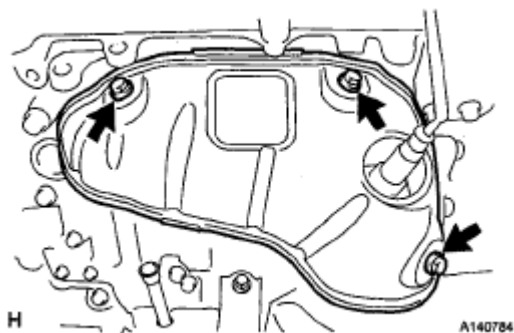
Removing No. 2 Exhaust Manifold Heat Insulator
